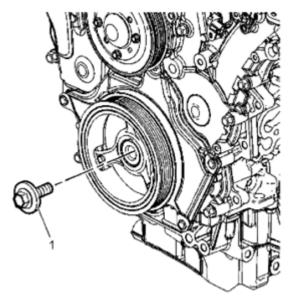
Identifying Crankshaft Pulley Bolt Courtesy of SUZUKI OF AMERICA CORP.
